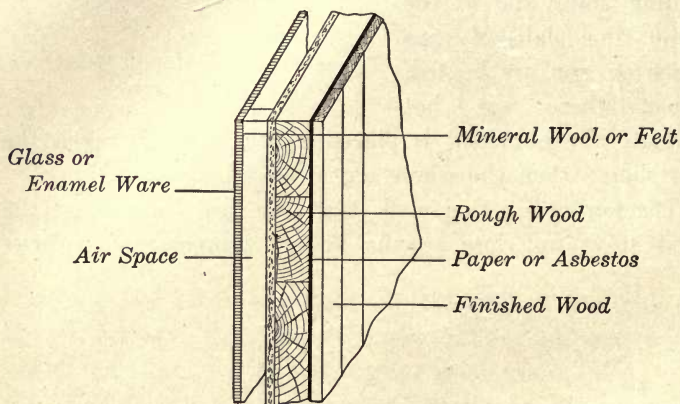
THE CROSS SECTION OF A REFRIGERATOR WALL.
